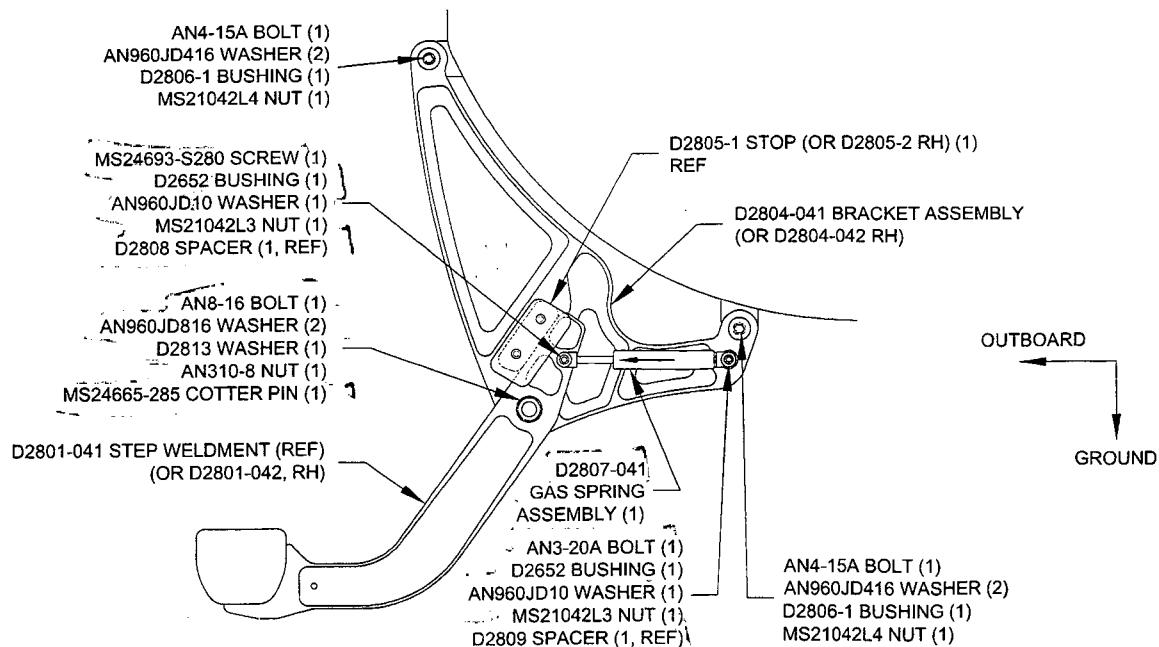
Strut Detail for D412-630-011/-012 Heli-Access-Step™ Installation (NOT TO SCALE)
